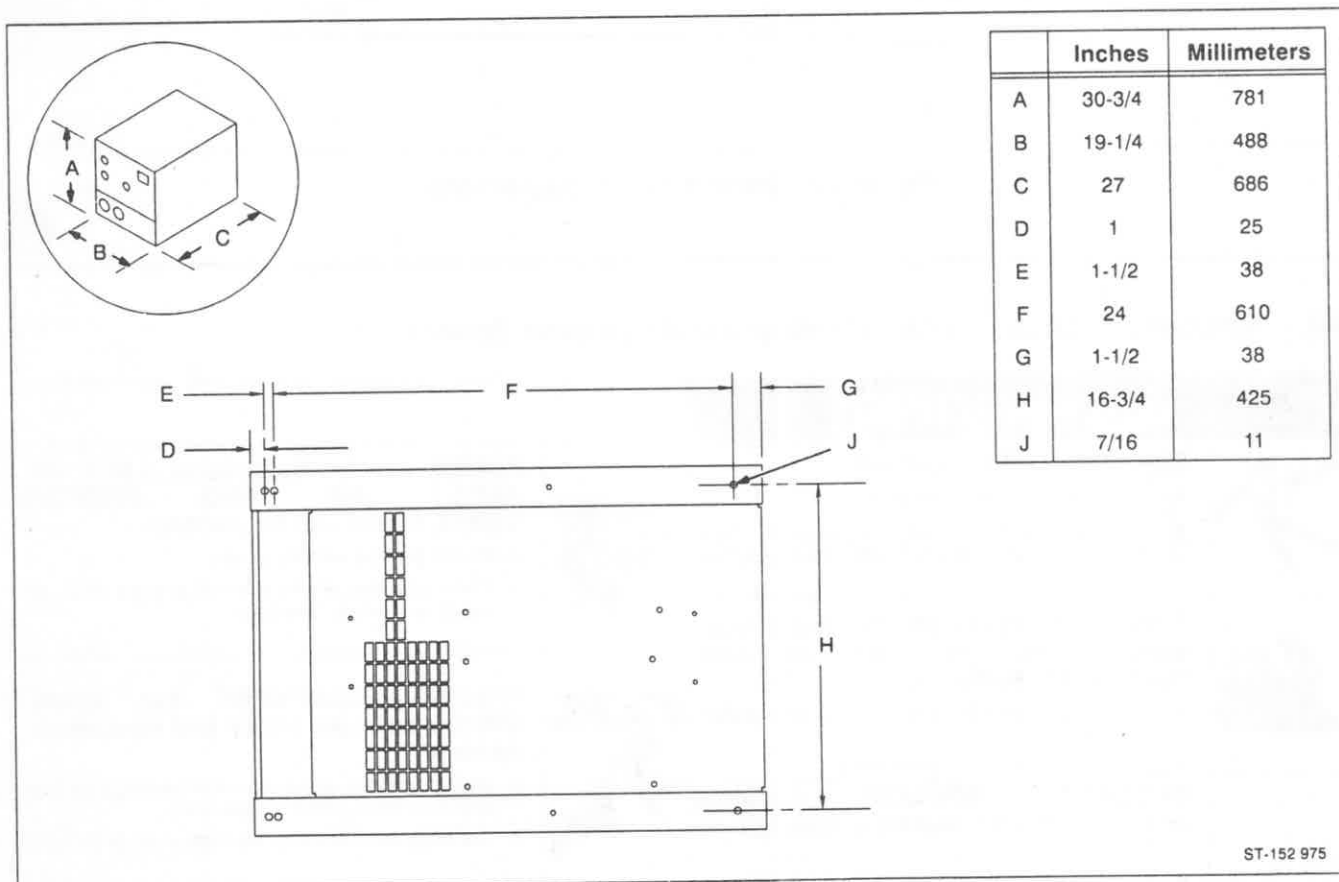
Overall Dimensions And Base Mounting Hole Layout
